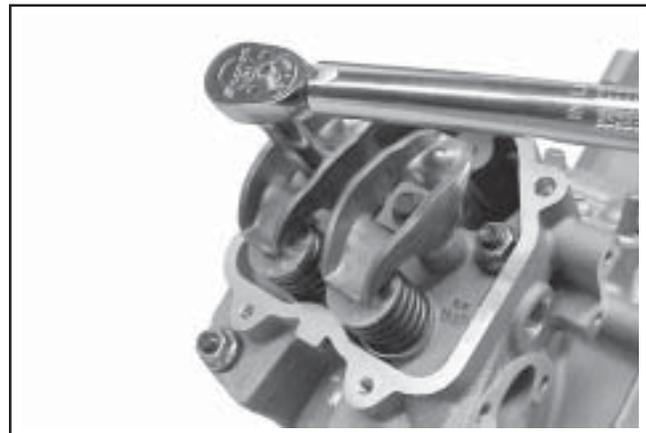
Installing and Torquing Rocker Arm Mounting Screws.
